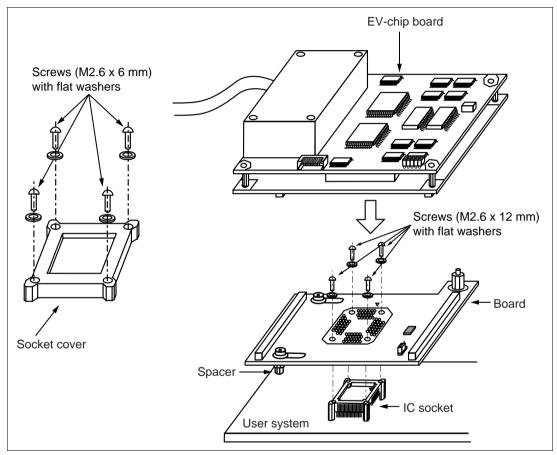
User System Interface Board for the SH7047 FP-100M Package
